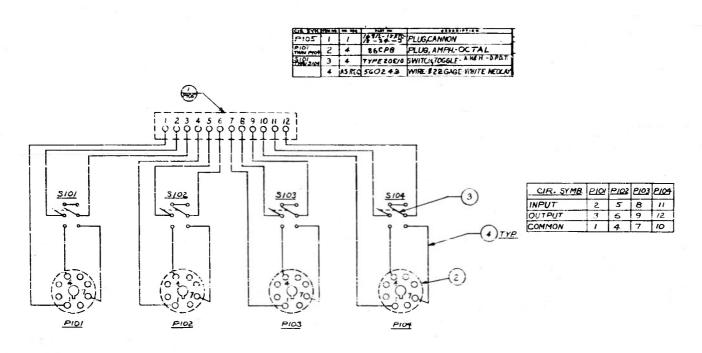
Schematic, Low Pass Filter Mounting Assembly
